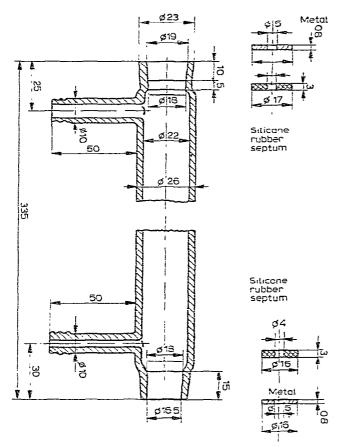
Dimensions (mm) of the glass jacket of the 0.3 m \times 1/4 in. O.D. µBondapak-C₁₈ column.
